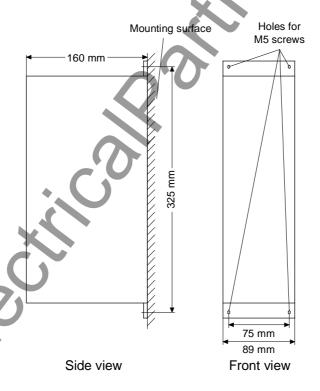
Dimension drawing of the 12 A / 18 A EMC filter
